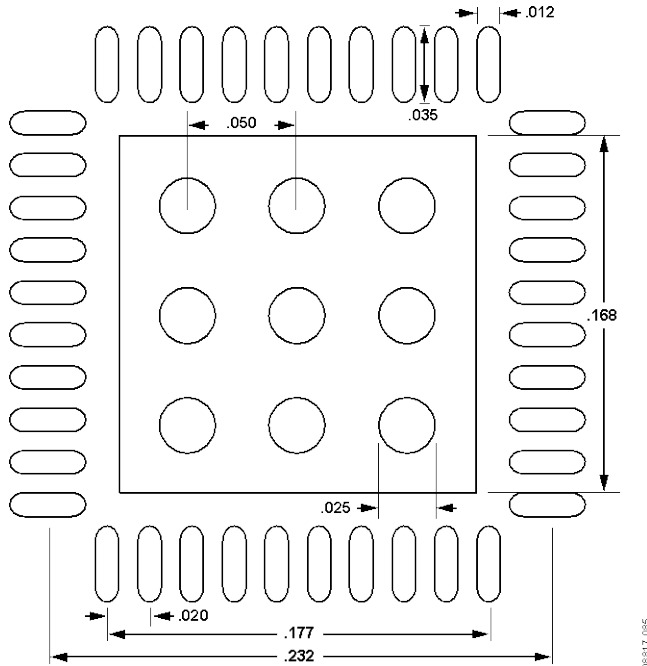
Evaluation Board Layout Dimensions for the [ADRF6655](#) Package
